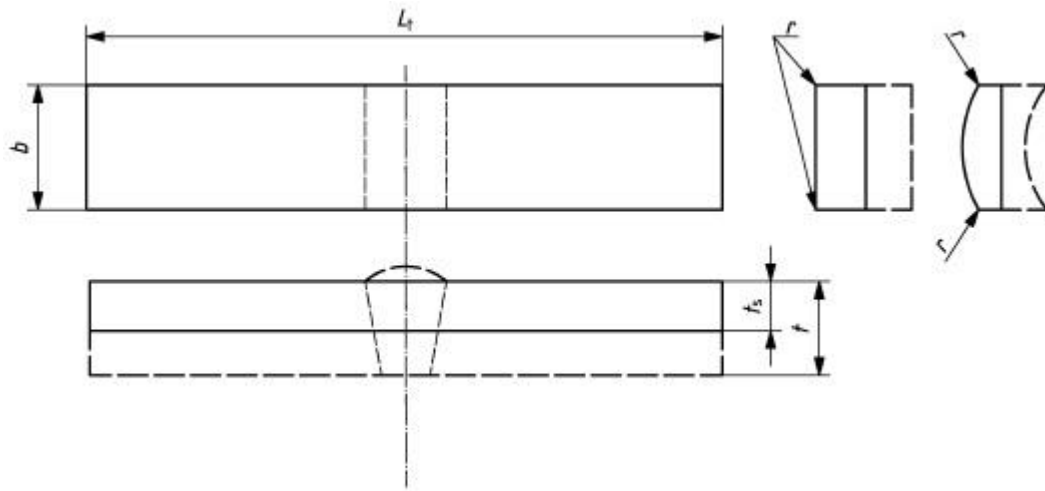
Geometry of face bend test piece for butt welds (SFS-EN ISO 5173, p. 13).
